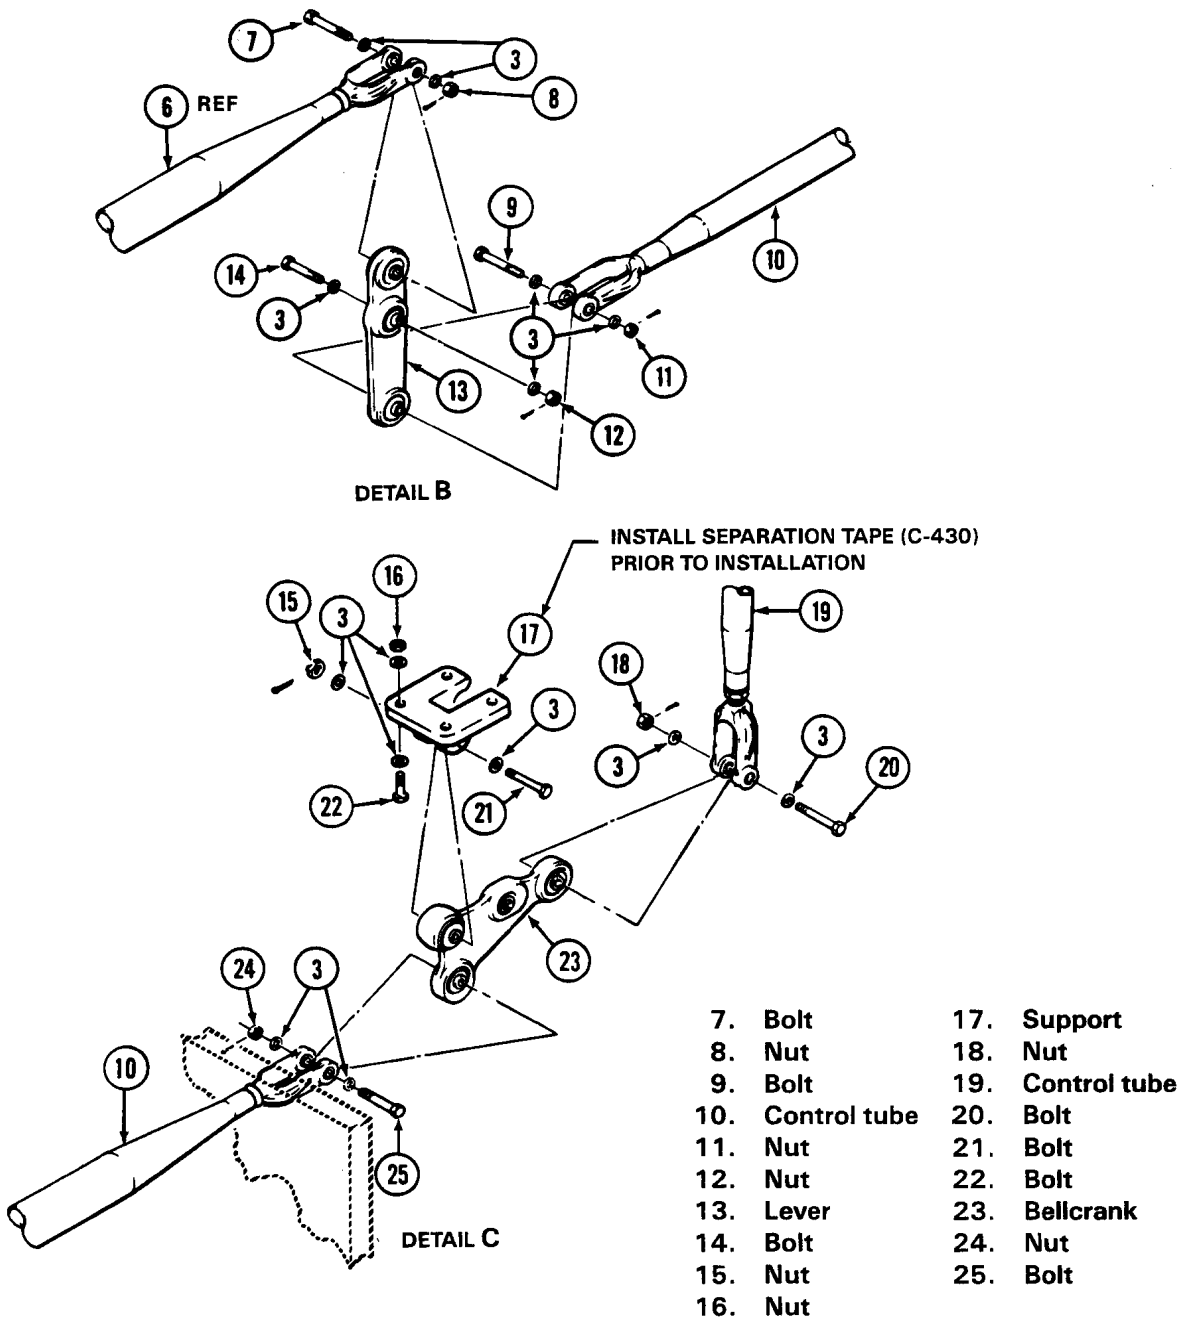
Bellcranks, levers, supports, and control tubes — collective control system — removal and installation (Sheet 2 of 2)
